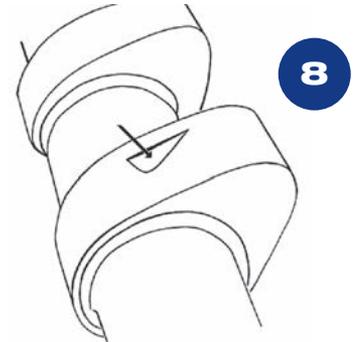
Look for edge-wear on the opening side caused by a misaligned roller
